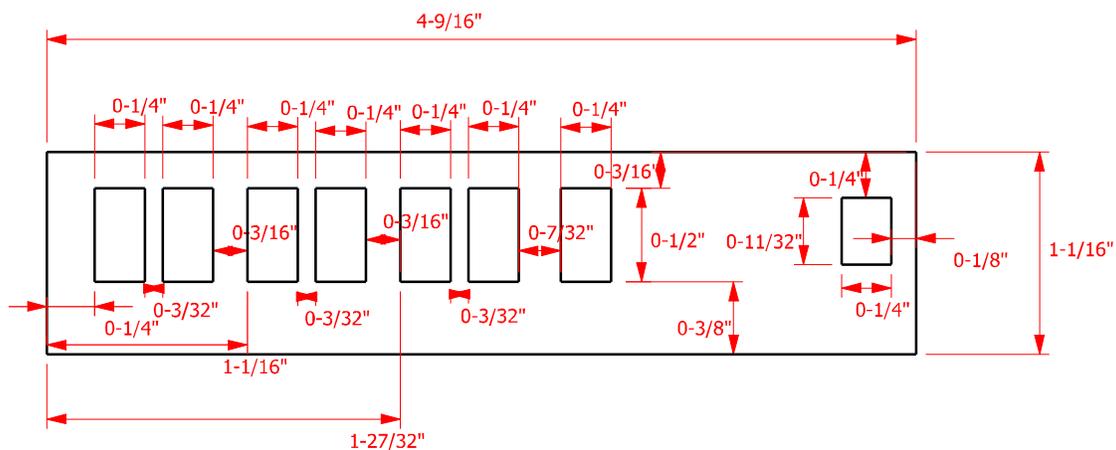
Drovers Caboose side view - dimensions expressed in feet/inches down to 1/32-nd of an inch
